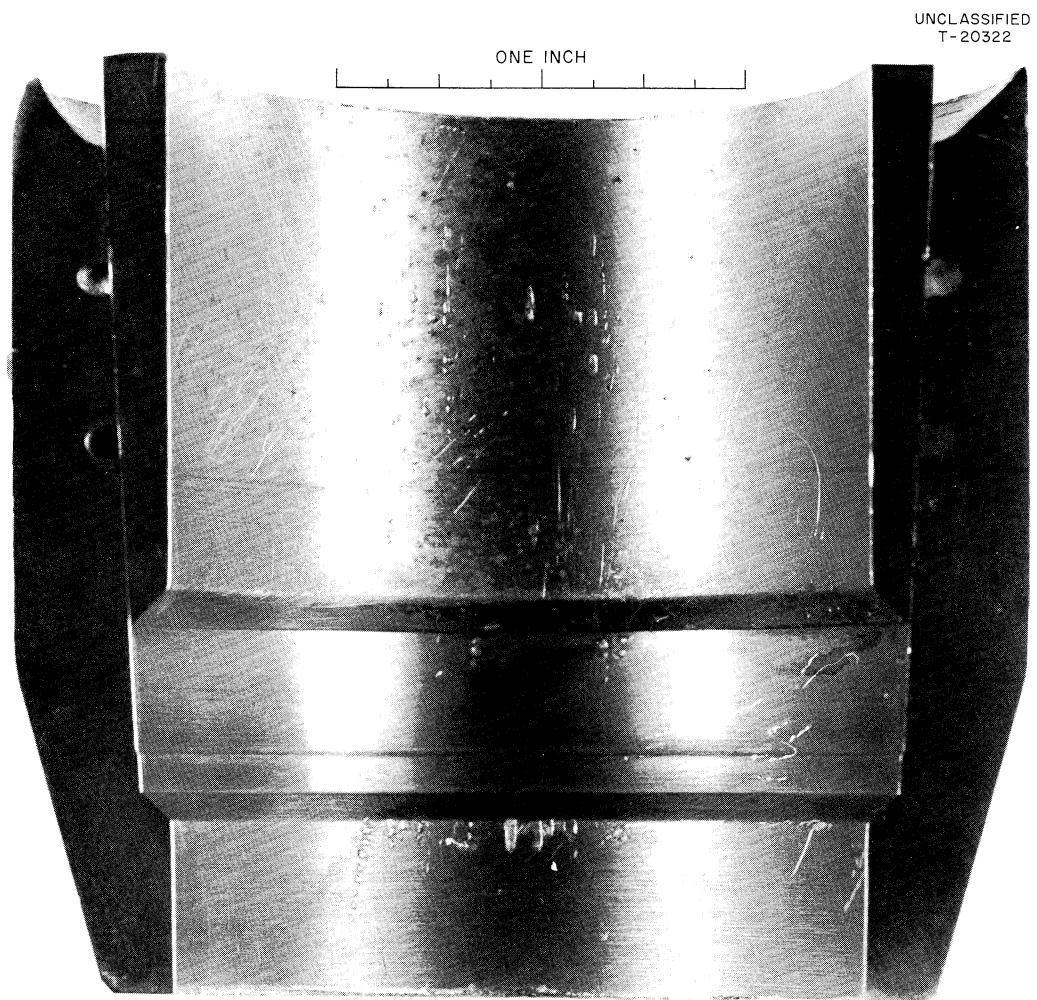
Assembled and Sectioned Brazed Joint.
